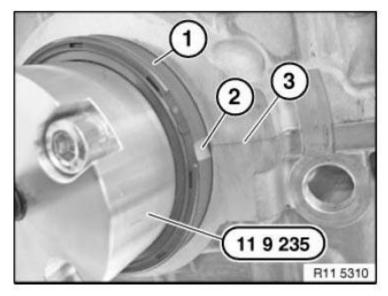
Mounting Special Tool 11 9 235 With Special Tool 11 9 234 On Crankshaft Courtesy of BMW OF NORTH AMERICA, INC.
